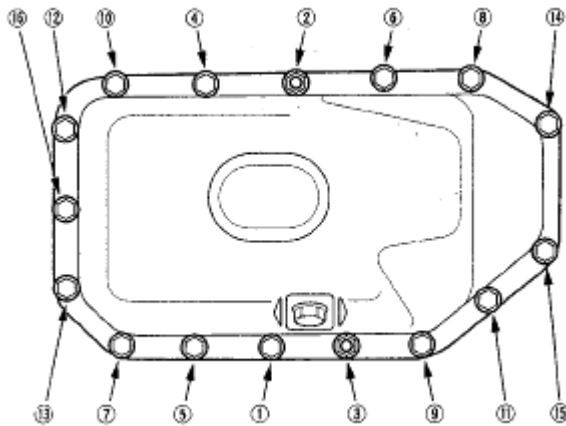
Identifying Oil Pan Bolt/Nut Tightening Sequence
